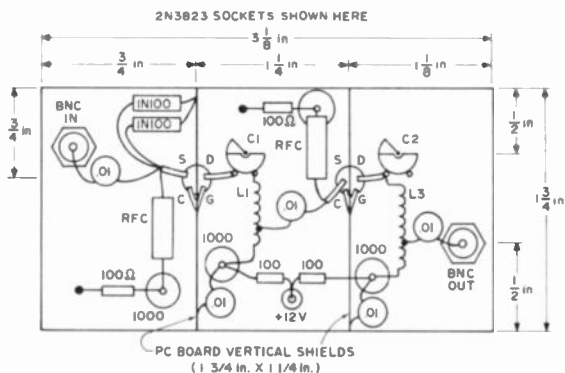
Sketch shows layout of FET preamp. Note use of shield walls between stages.
